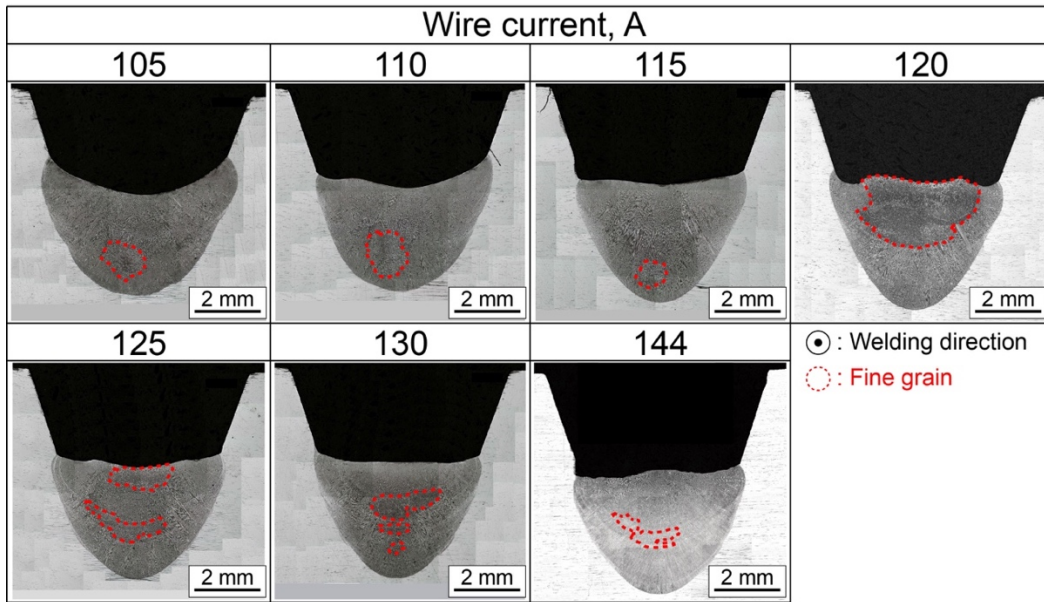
Cross-section of weld bead and position of fine grain in weld metal at each wire current on SUS310S.
